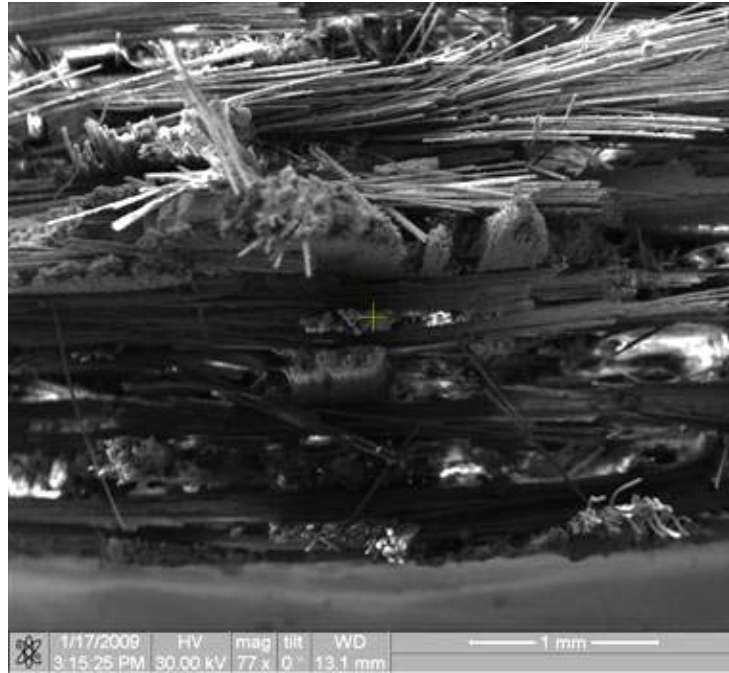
Fracture surface of the N720/AM specimen tested in tension to failure at 1000°C in laboratory air
